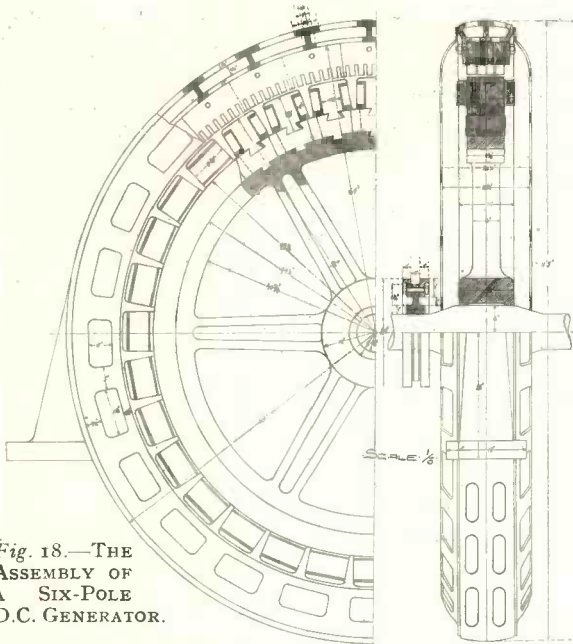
THE ASSEMBLY OF A SIX-POLE D.C. GENERATOR.
